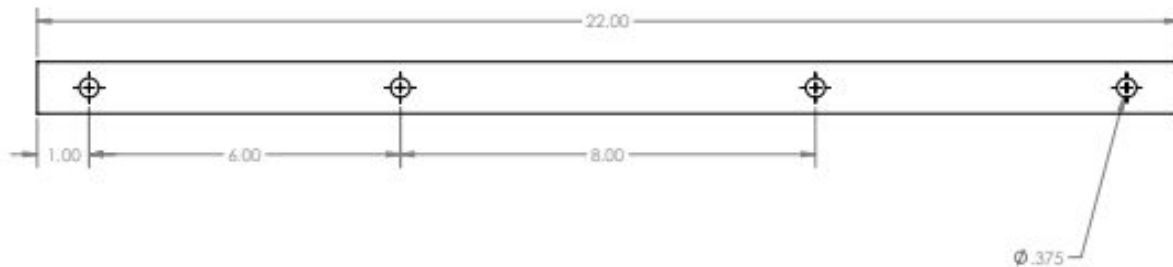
Hole Locations in Aluminum Tubing (Side View)
